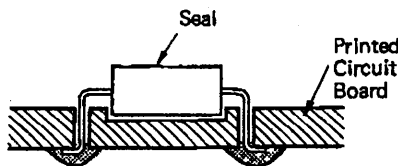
Mounting by Seating Transistor on Shallow Hole on Printed Circuit Board
